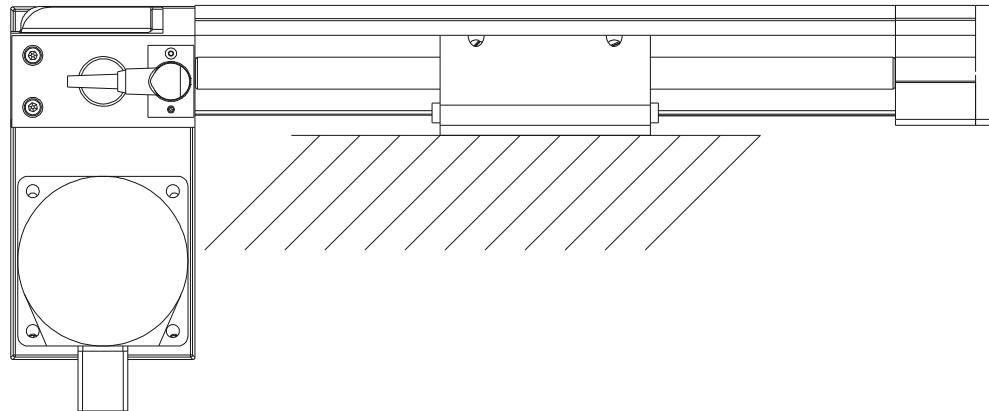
Attachment with continuously clamping elements (no shearing points)
